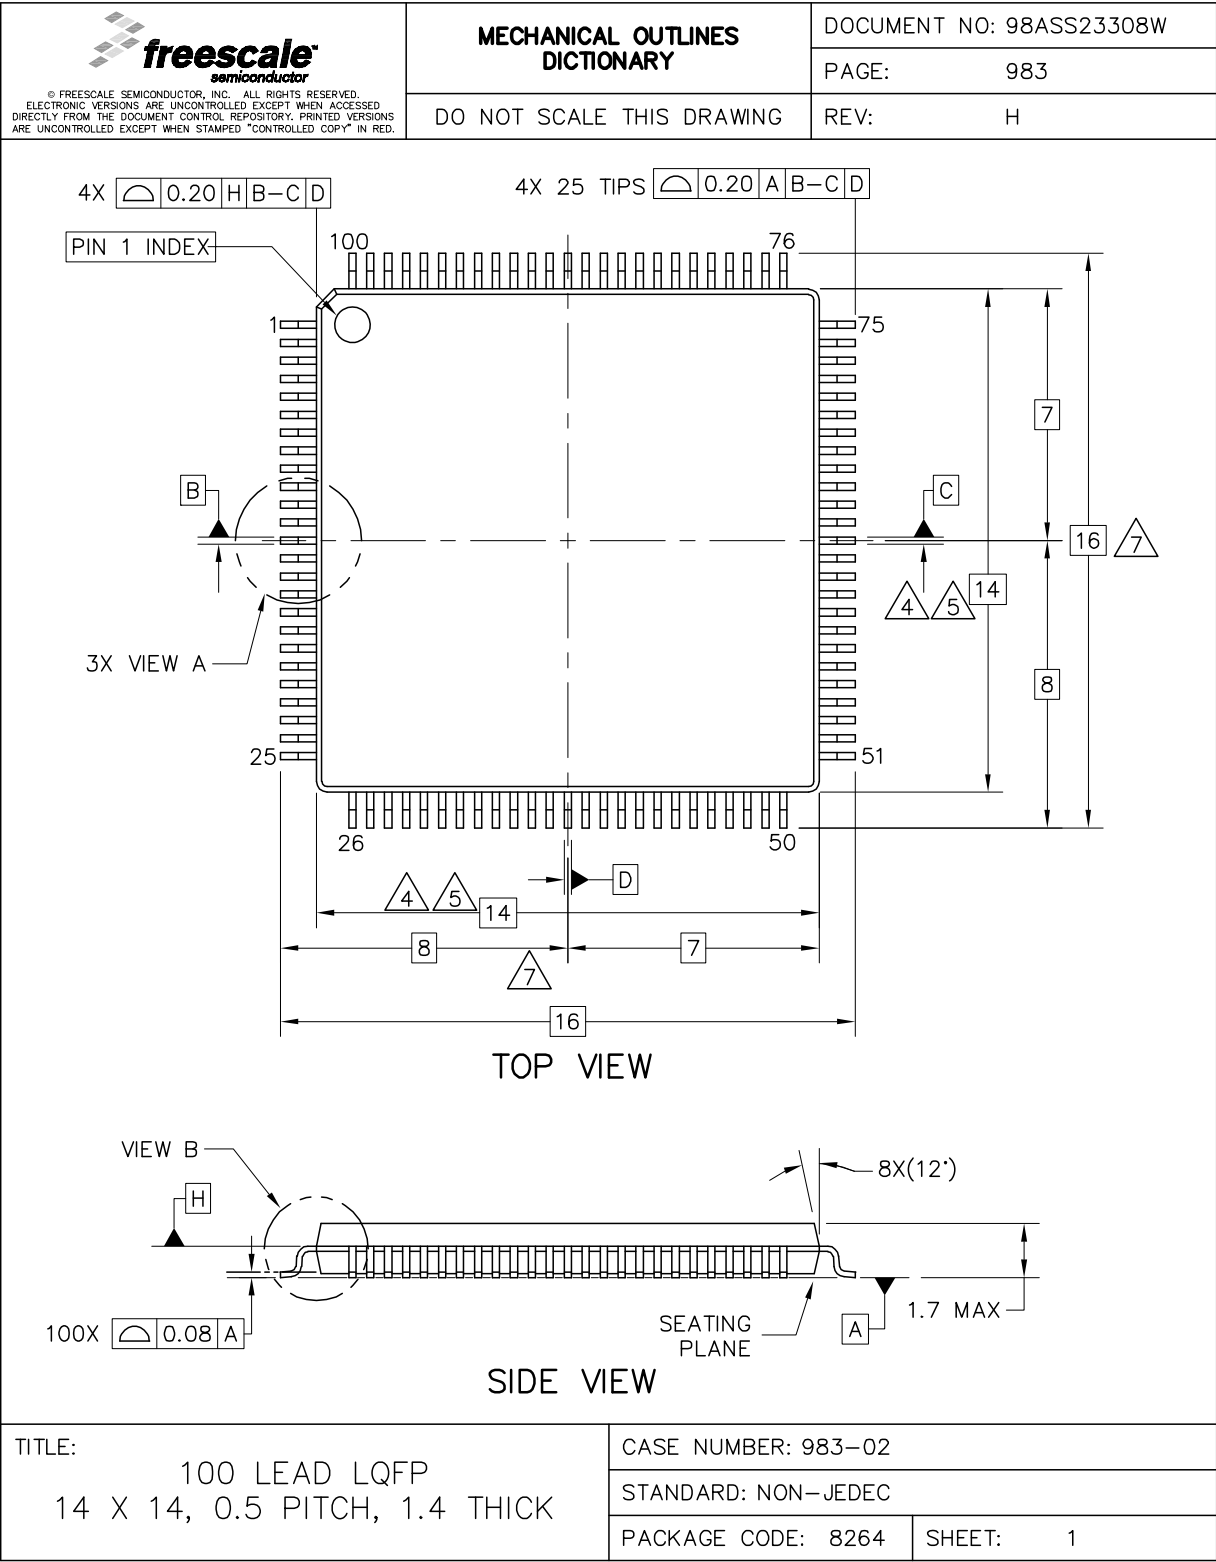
100 LQFP package mechanical drawing (Part 1 of 3)
